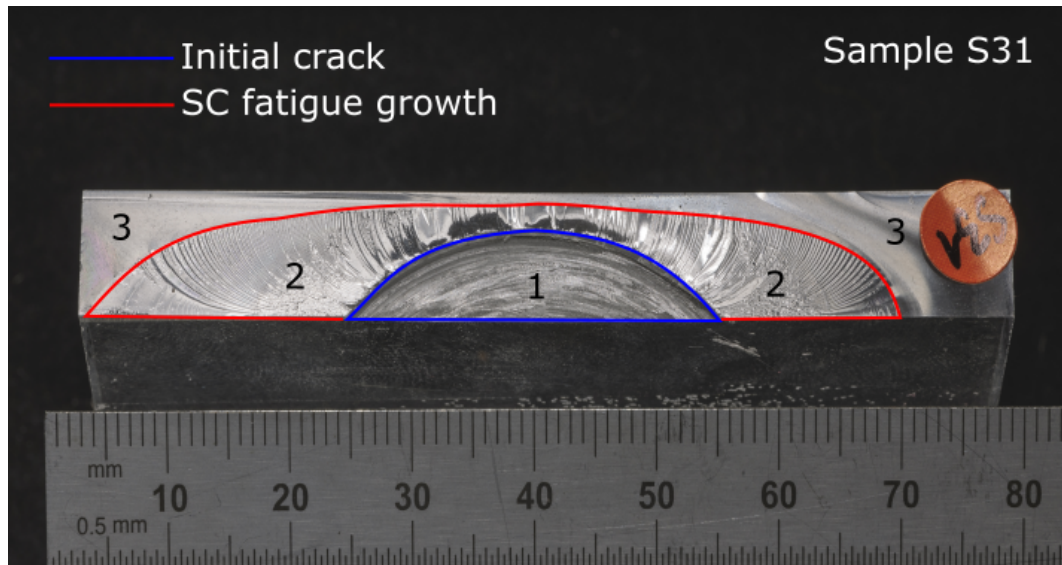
Test on Perspex plate - Fracture surface - Sample S31
